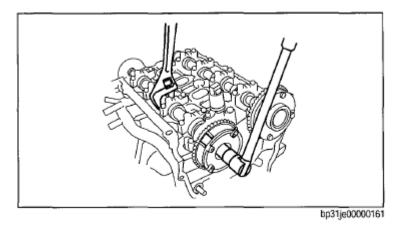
Holding Camshaft And Rotating Actuator Bolt Using Tool
